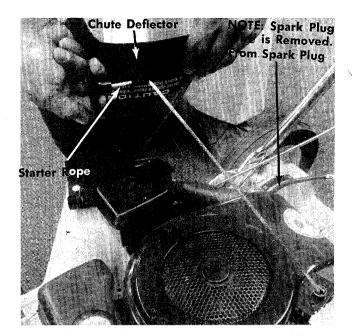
SECURING DEFLECTOR FOR ASSEMBLY
